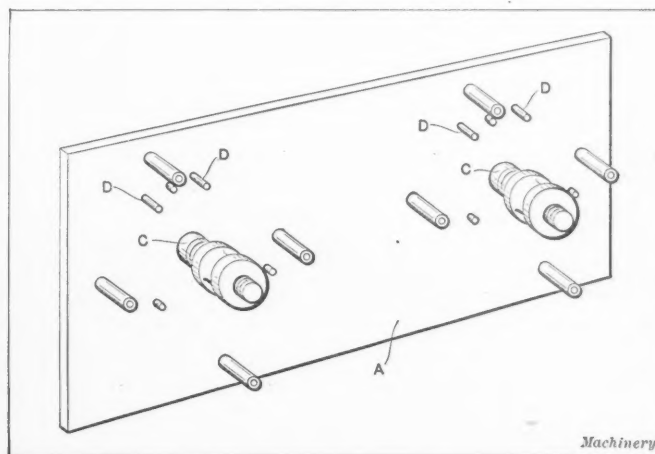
Detail View of the Fixture shown in Fig. 6 guide studs *C* by two guide pins *D* in the proper positions from one of the arms. This type of jig is of open construction, easily cleaned, and enables the work to be removed and replaced very quickly.
